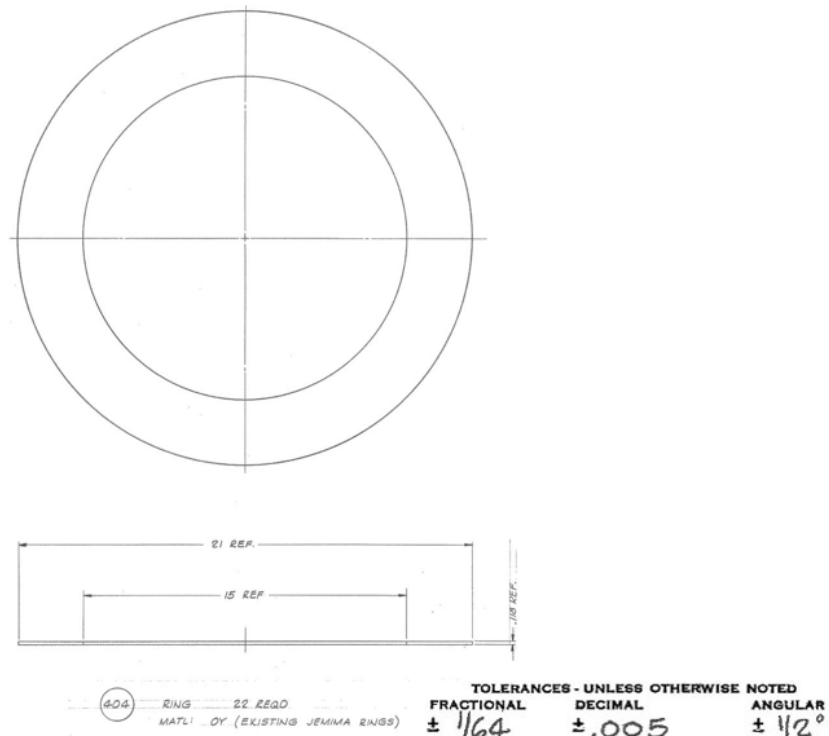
Engineering Drawing (19Y-29621-30A) of the HEU Outer Ring: HEU 21/15 (Dimensions in Inches).
